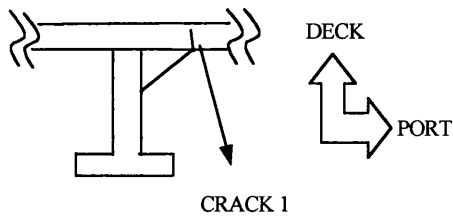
Most probable crack at the deck plate/longitudinal stiffener connection
